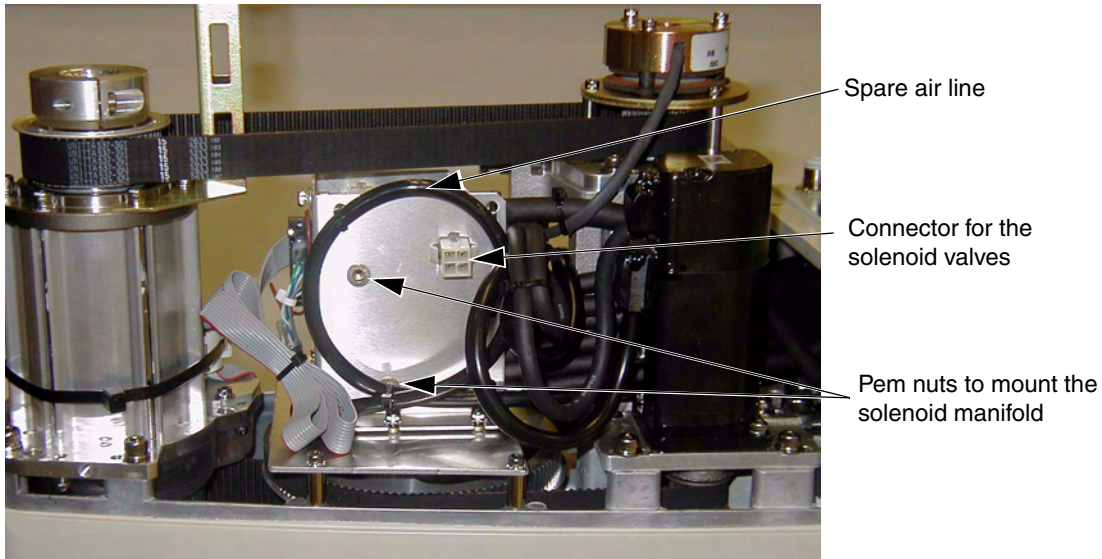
Solenoid Mounting Bracket With Connector and Spare Air Line
